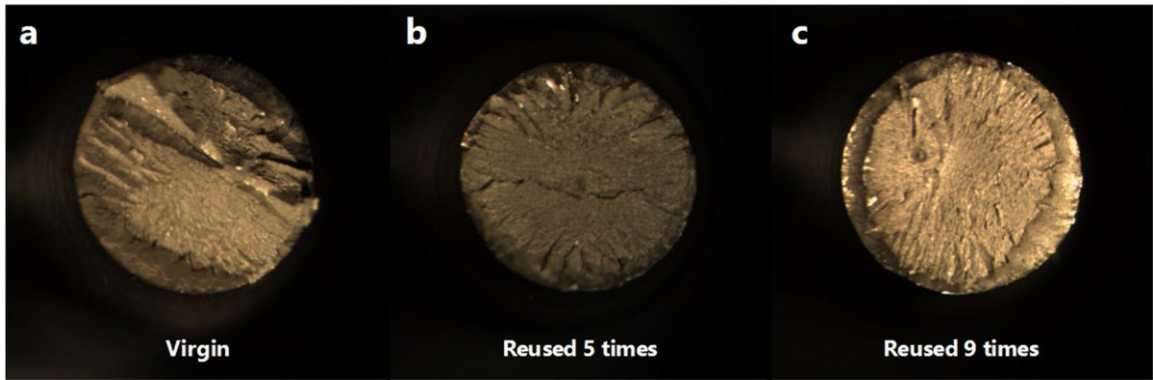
Fracture surfaces of the PH1 tensile samples produced with virgin and reused powder. a) Virgin. b) Reused 5 times. c) Reused 9 times
